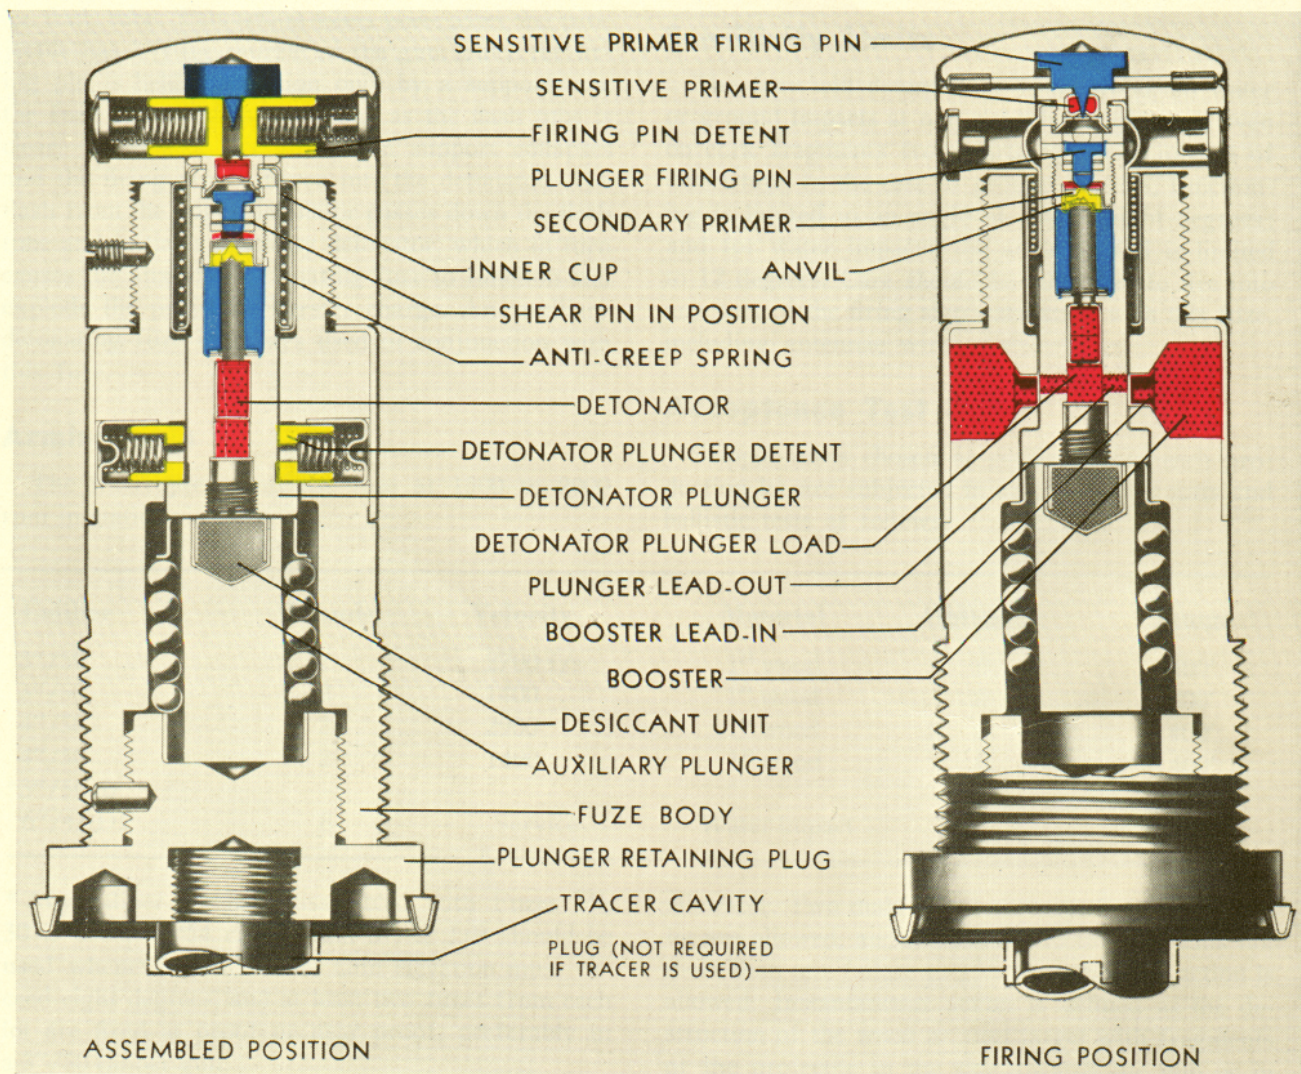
Base Detonating Fuze Mk 31—Sectional View
